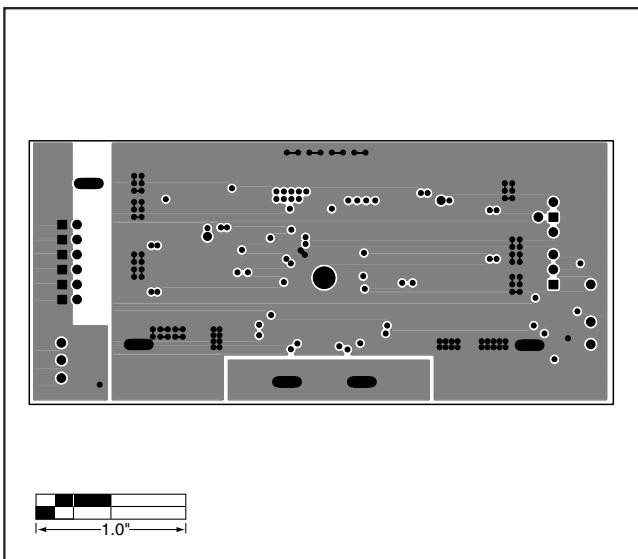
MAX8760 EV Kit PC Board Layout—Internal Layer 2—VOUT/GND Plane
